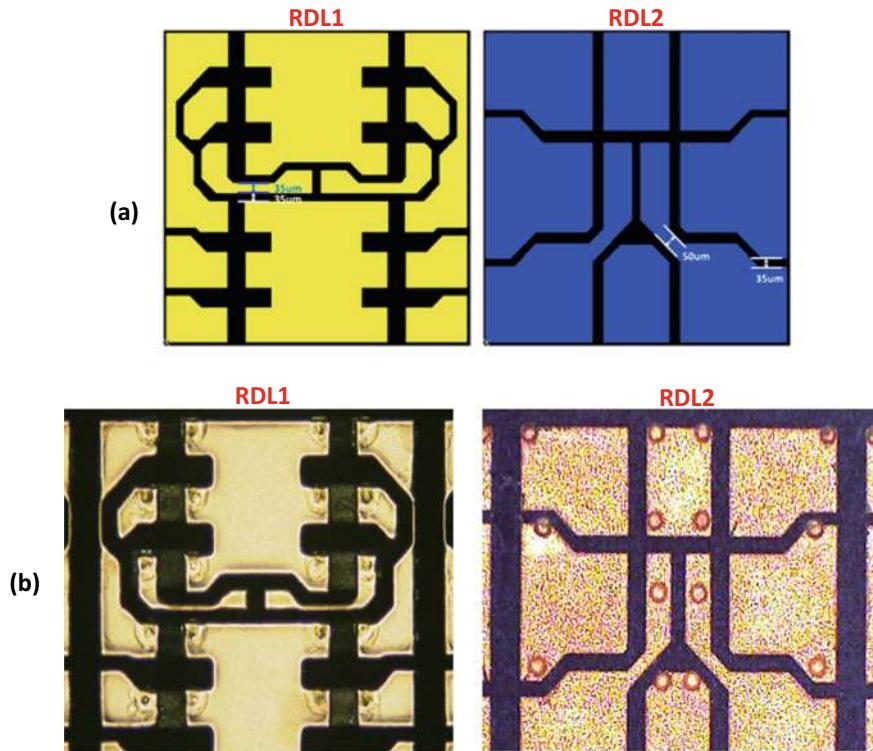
RDLs. a Layout of RDL1 and RDL2. b Fabricated RDL1 and RDL2
